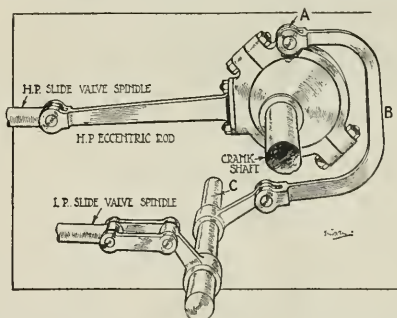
VALVE GEAR OF THE STEAM ENGINE IN THE BROTHERHOOD STEAM WAGON
